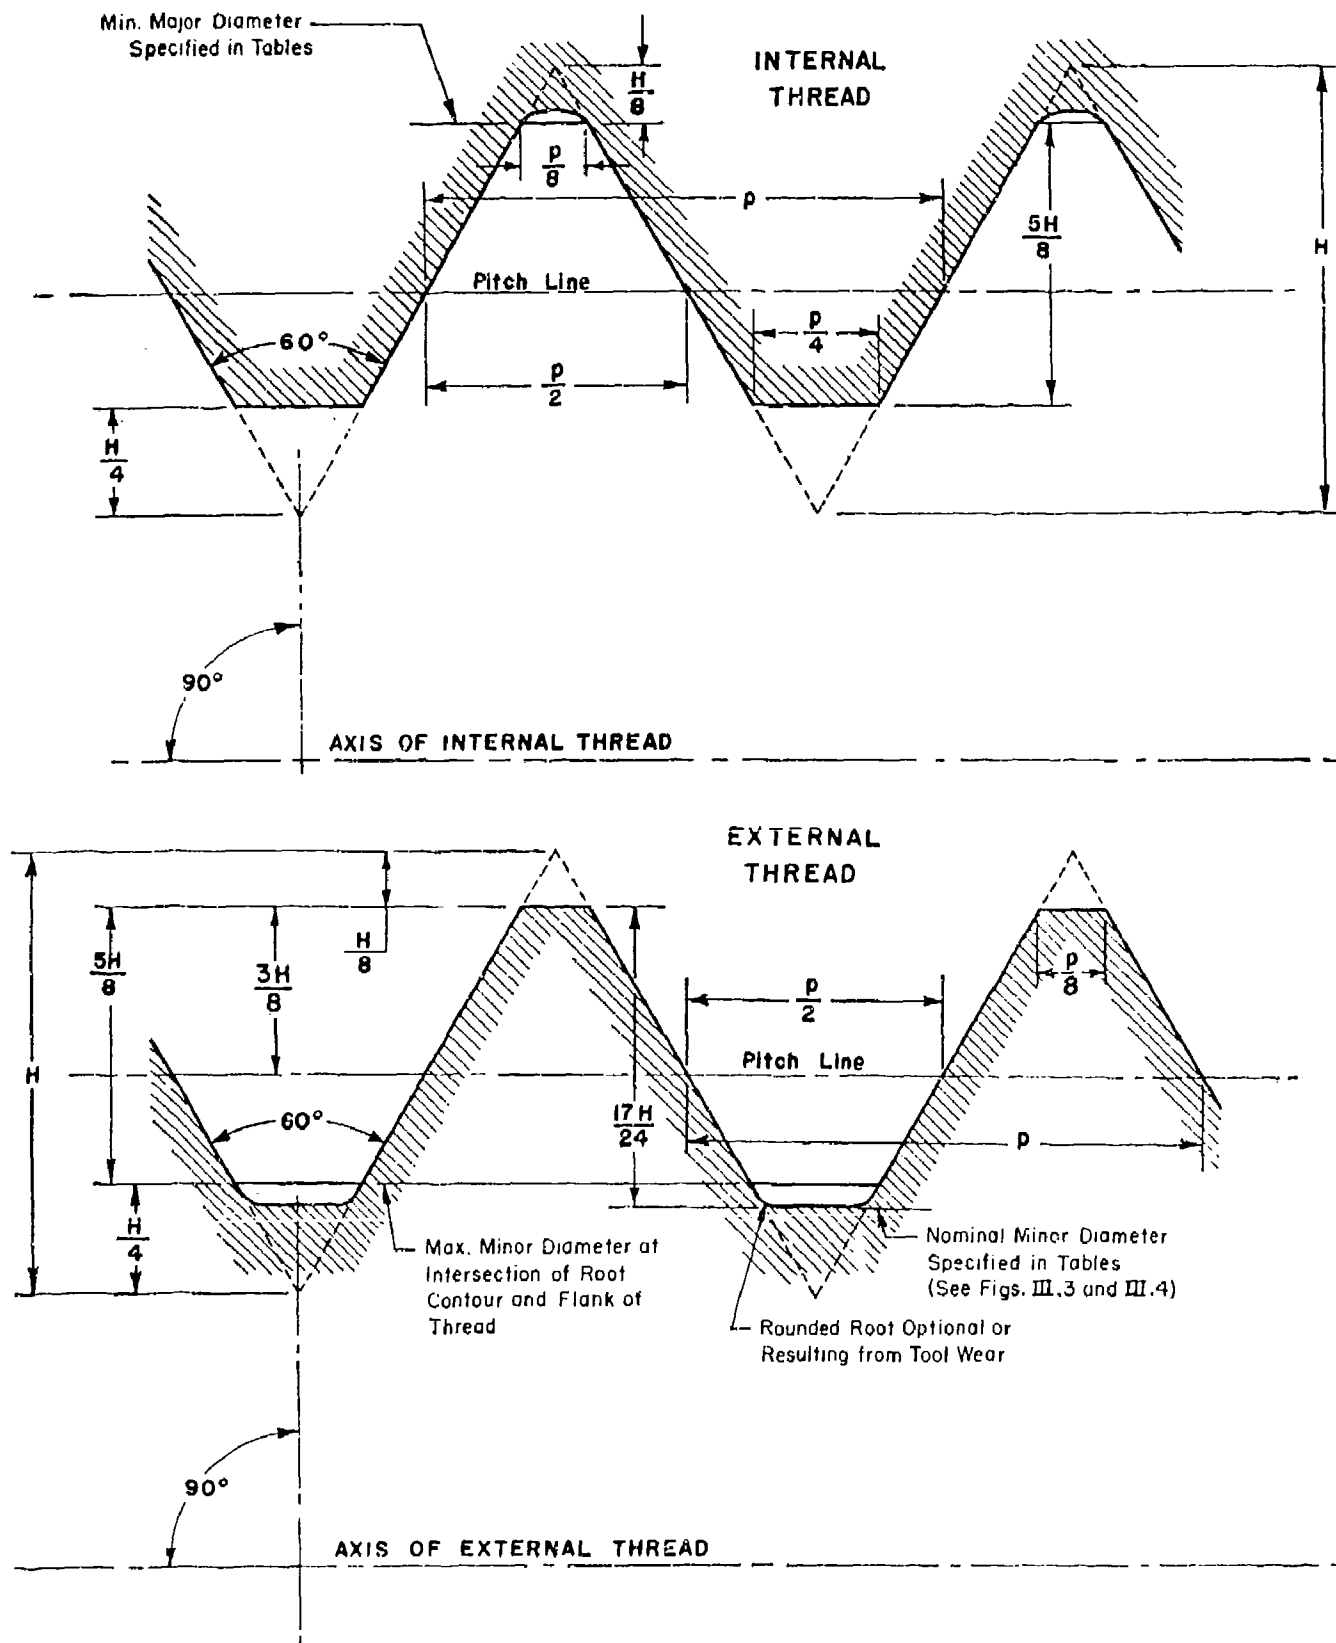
Unified internal and external screw thread design forms (maximum material condition).
